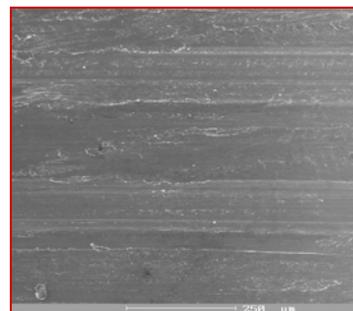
The machined surface morphology - the cutting tool HSCo, 8 % Co, mag. 90x,  $v_c=50$  m/min,  $f=0,08$  mm, steel Cr20Ni8Ti
